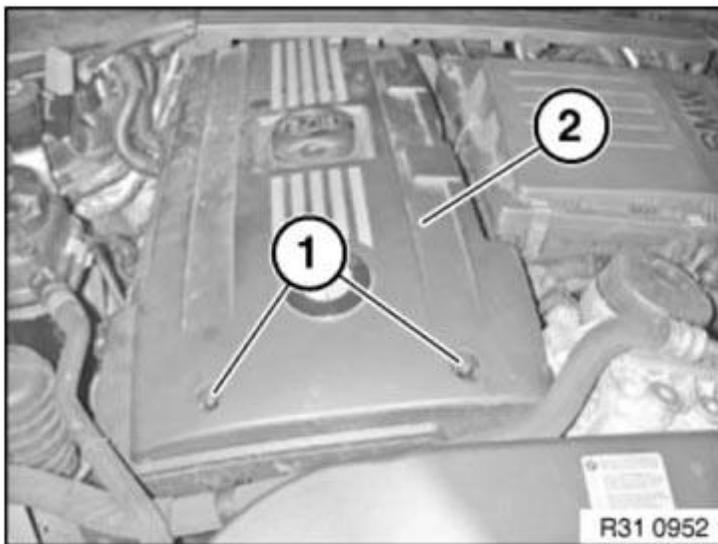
Identifying Acoustic Cover With Mounting Screws
